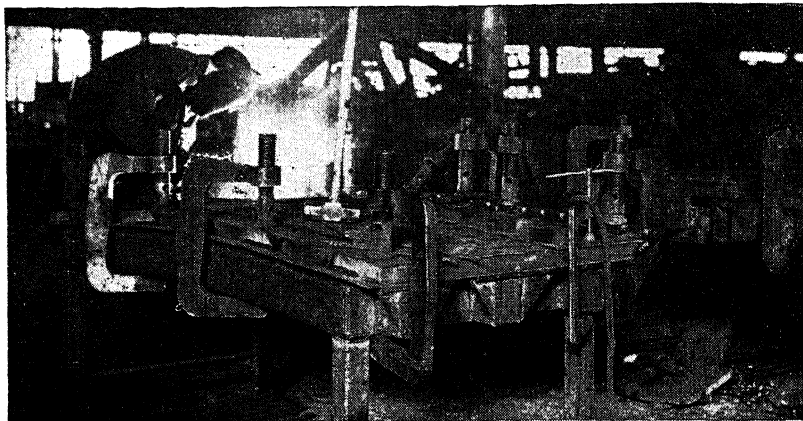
Bottom of earth scraper. Parts to be welded are clamped to a work table with a certain amount of pre-camber to offset warpage.
